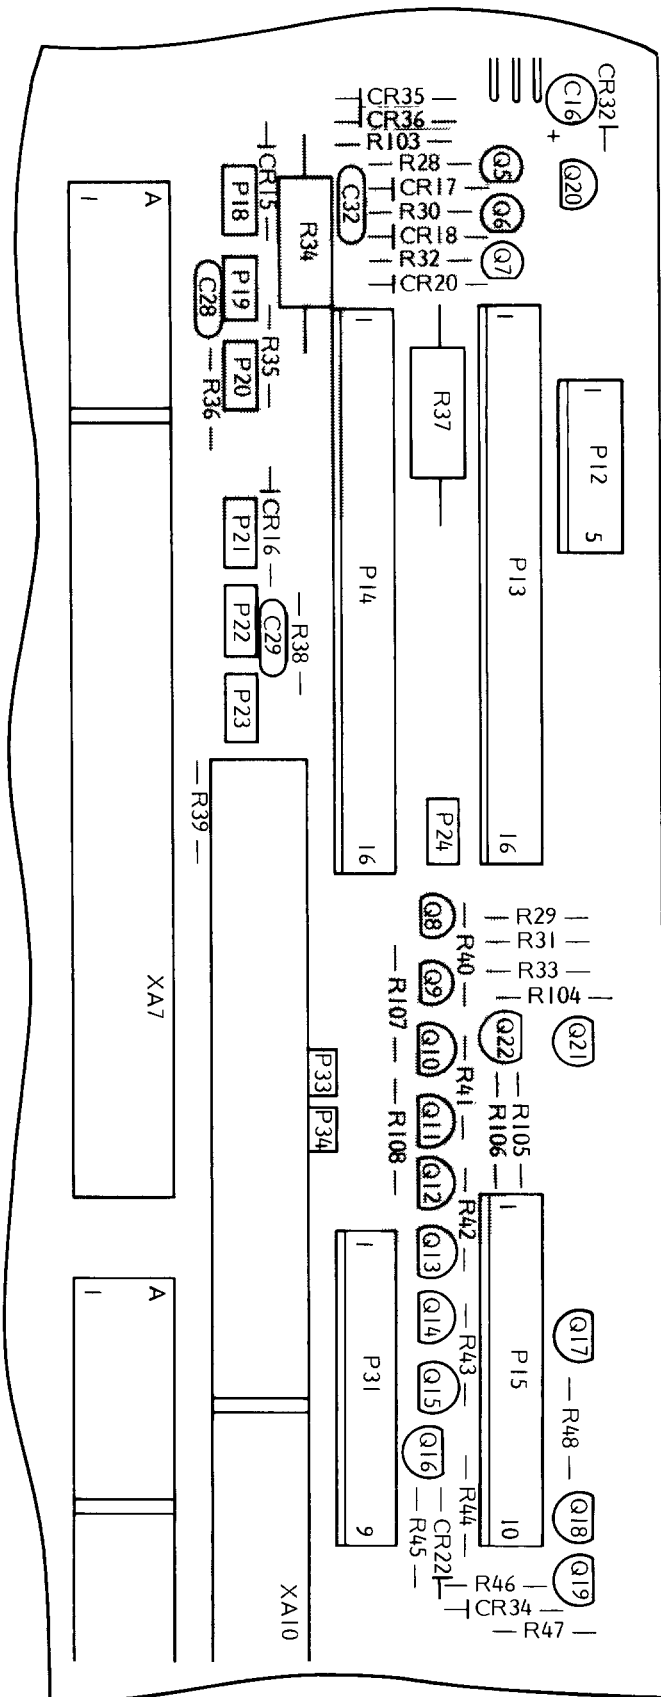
A6 Het/YIG Driver (Assy. 660-D-8007) PCB Schematic (Sheet 3 of 3)
